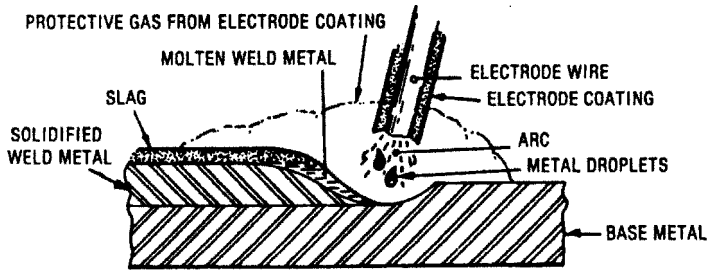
Shielded metal arc (SMA) welding. The consumable electrode used in this process is coated with a flux that has a variety of functions, including forming a gas to shield the molten weld metal. The arc is established manually by the welder, who feeds the electrode into the work area. This process, commonly used on mild steels, may generate large quantities of metal fume from the electrode and base metal and gases from the vaporization of the welding rod coating.
